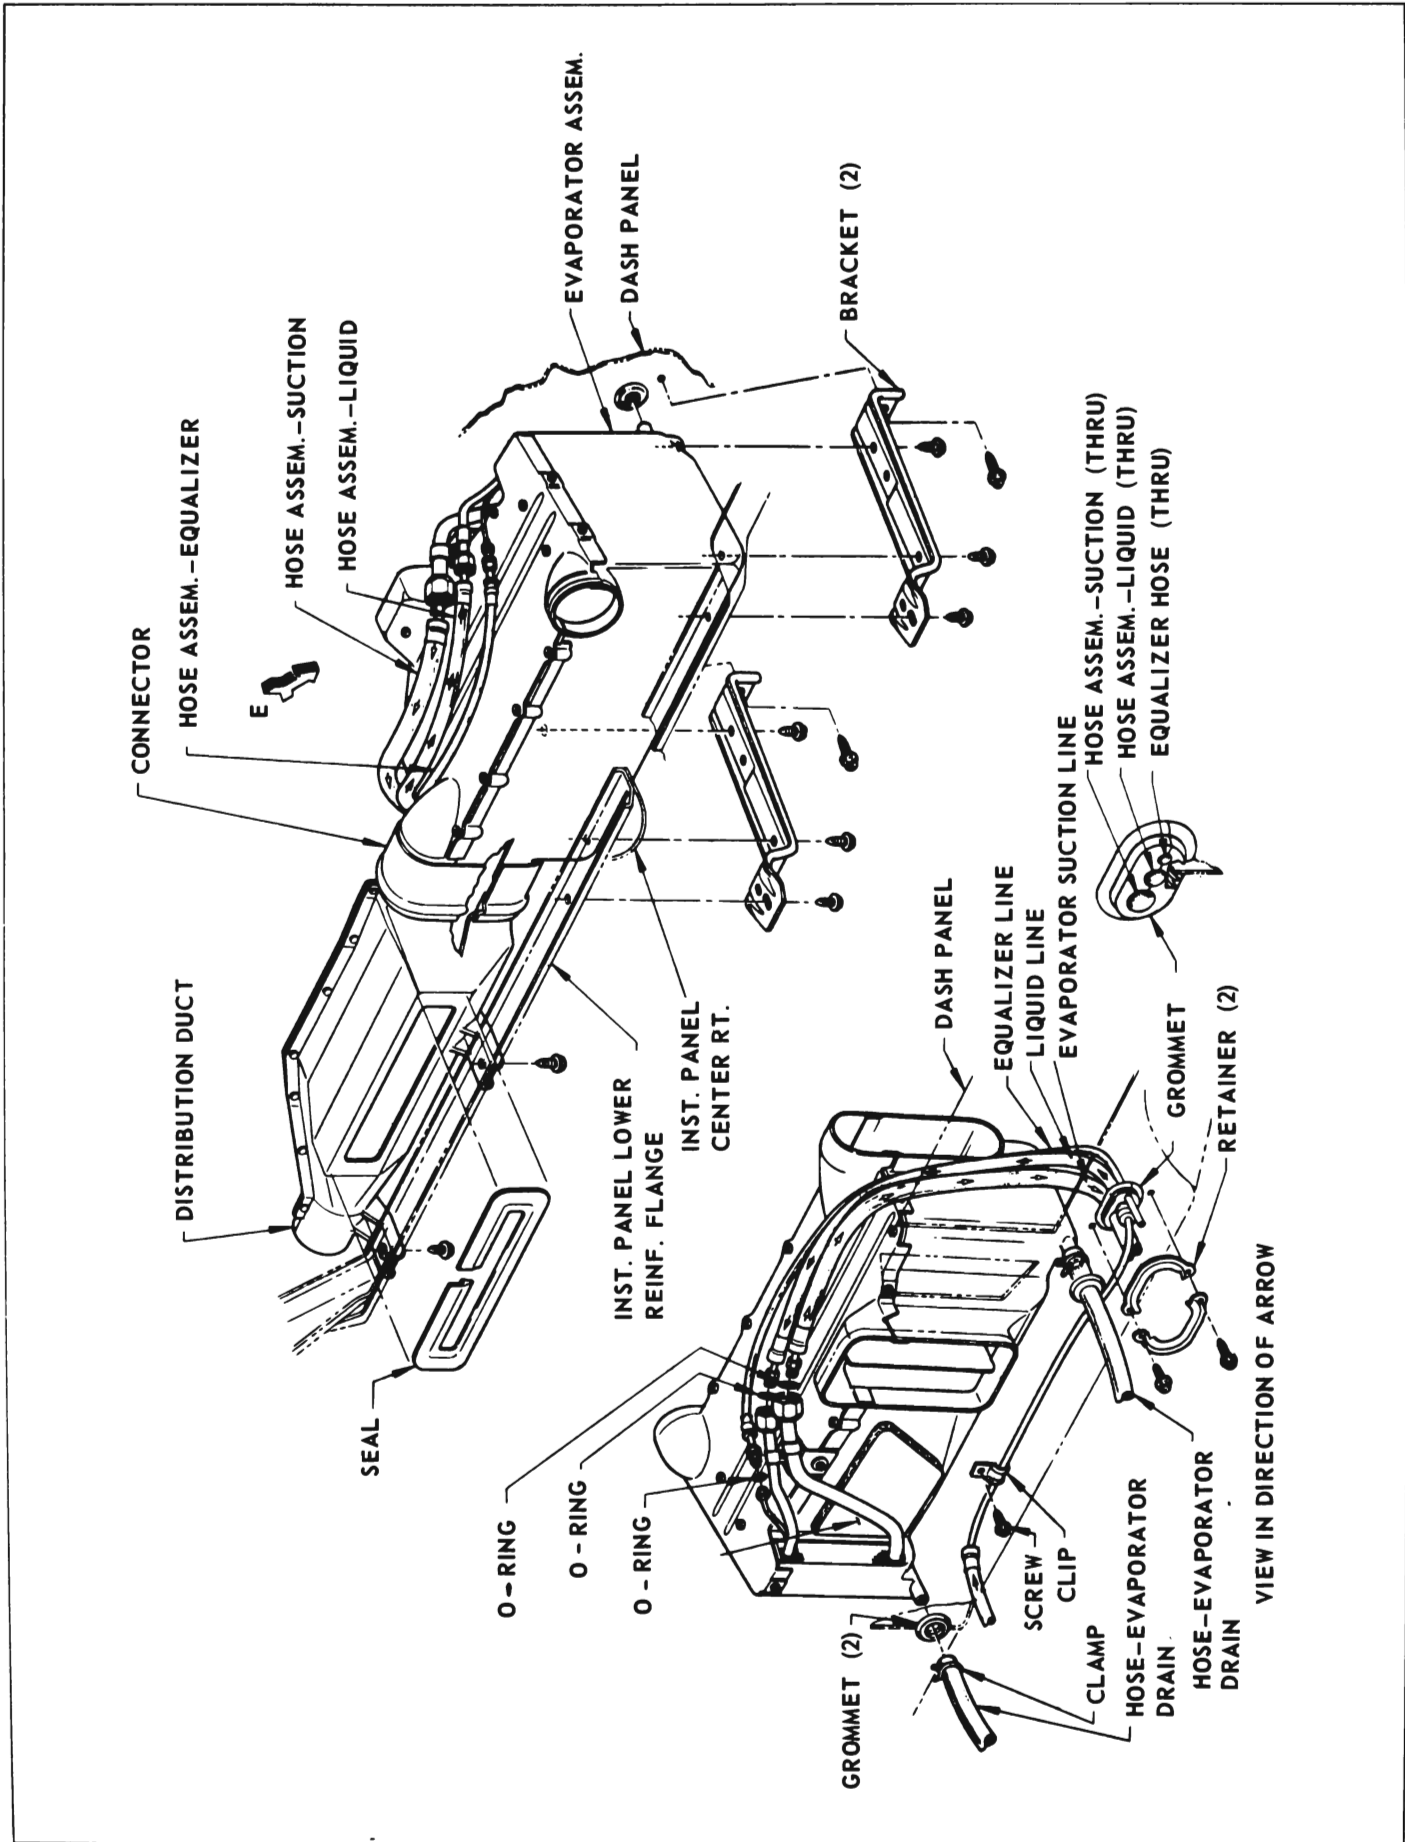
Evaporator and Distributor Duct Installation - 4700 Series
